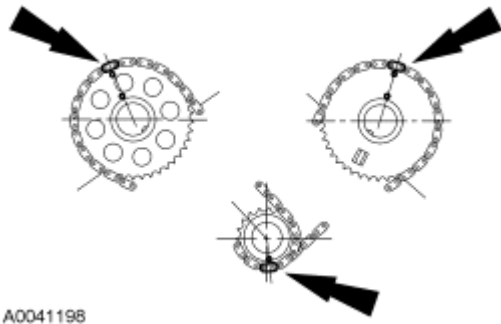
Identifying Copper (Marked) Chain Links And Dots On Crankshaft Sprockets And Camshaft Sprockets
